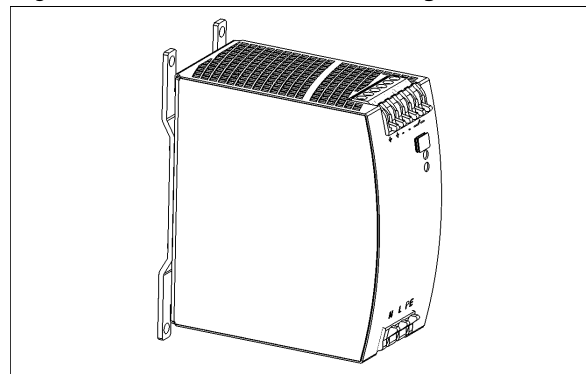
Assembled Wall / Panel Mounting Bracket
